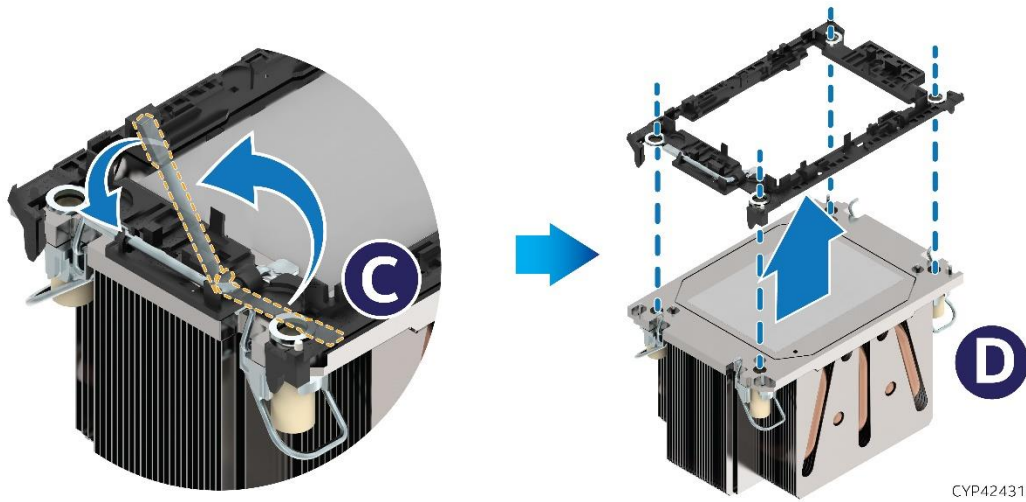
Processor Carrier Clip Removal from PHM Assembly
